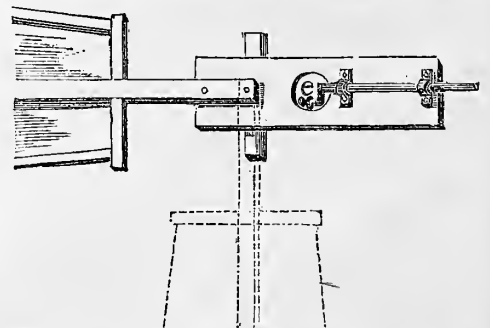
SHAFT, CRANK, TURN-TABLE, AND VANE.
